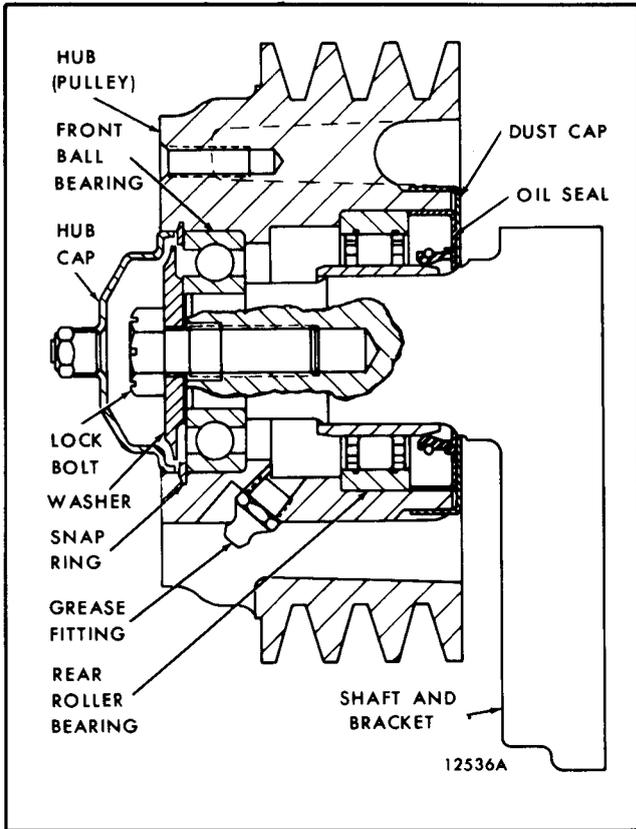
Shaft Type Fan Hub Assembly (4-53 and 6V-53 Engines)
